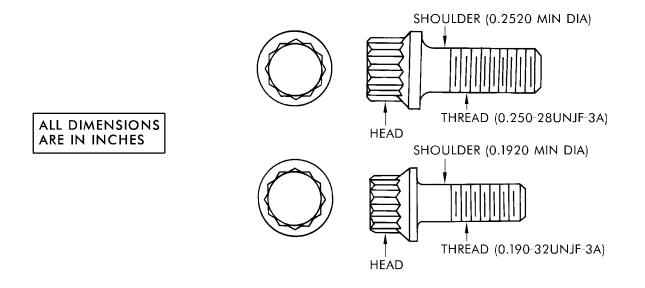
Compressor Stator Splitline Shoulder Bolts; Inspection
